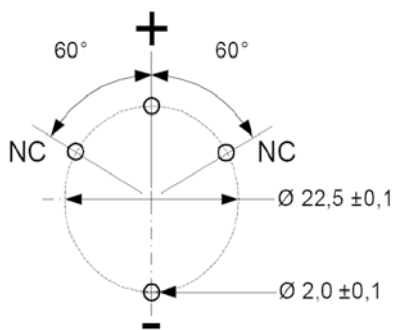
SI4PH - Keyed polarity 4 pin snap in version (here with 6,3 mm claw. The 4,5 mm claw is also available) and mounting hole dimensions (mm)
